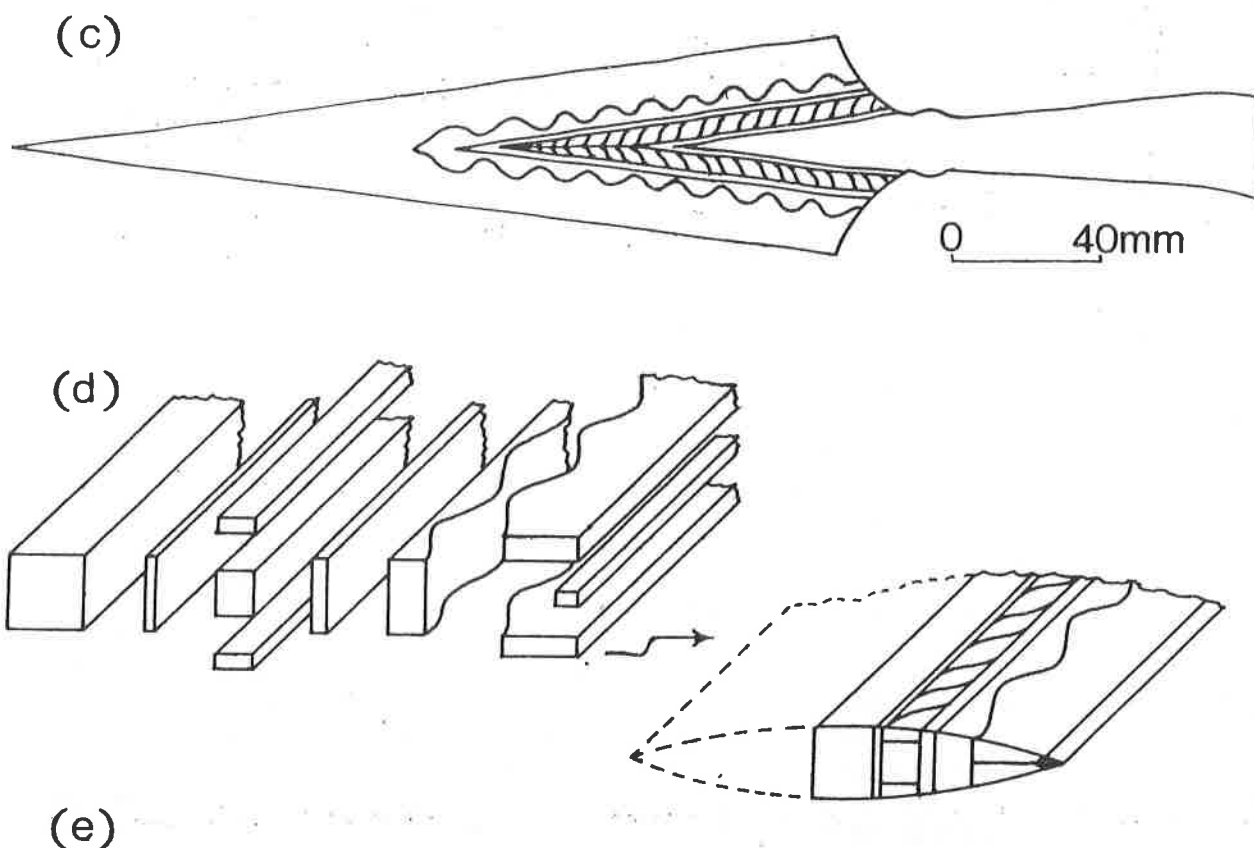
(continued) Section from same spearhead to show 'wavy' weld + surface detail drawn from X-ray and three-dimensional view.
